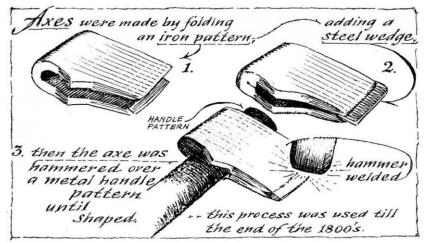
Principal operations in forge welding of an axe with insert
